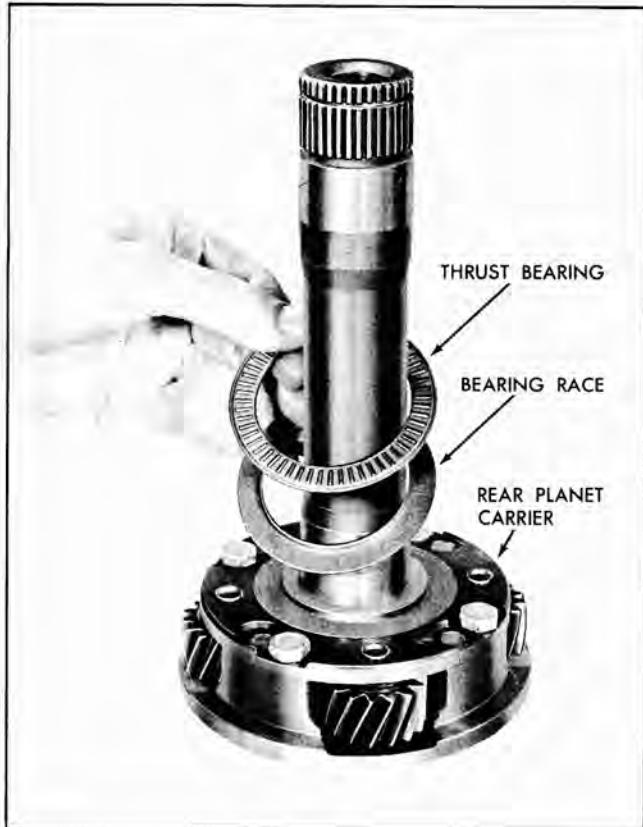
Installing Thrust Bearing on Rear Planet Carrier
